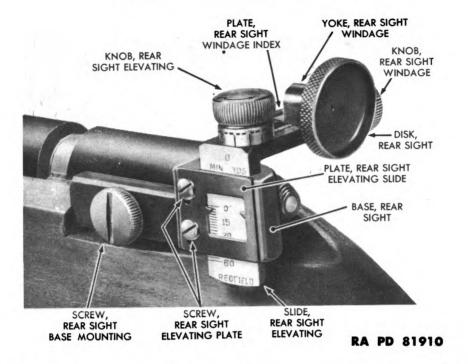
Rear Sight Assembly Mounted on Remington Rifle, Cal. .22, Model 513T — Left Rear View
